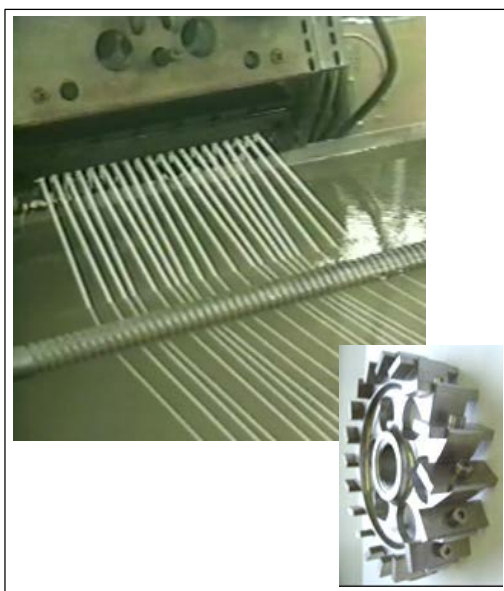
Photographs of the extrusion of strands and a cutter for pelletising
